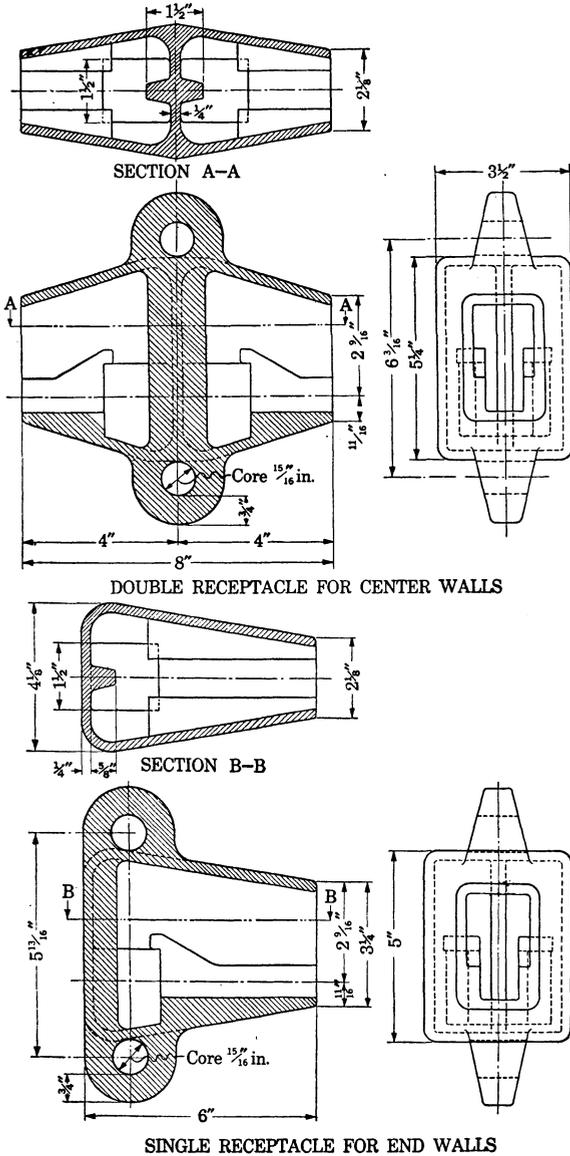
Bolt sockets for attaching guides, Campbell shaft
